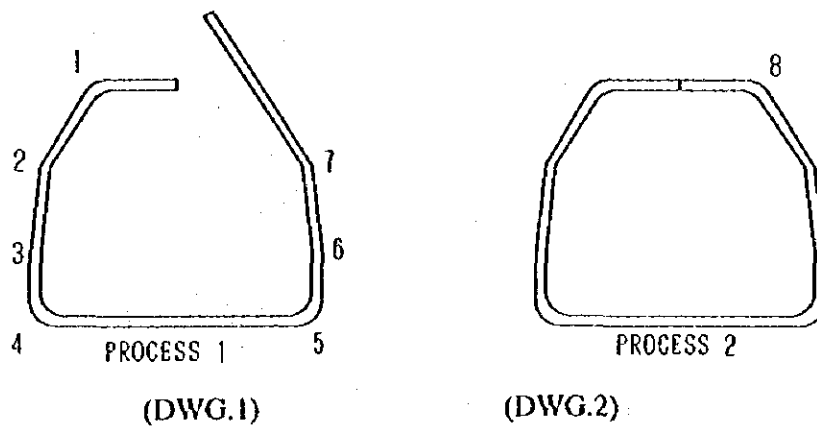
Plan for Improvement in the Pipe-frame Making Process
